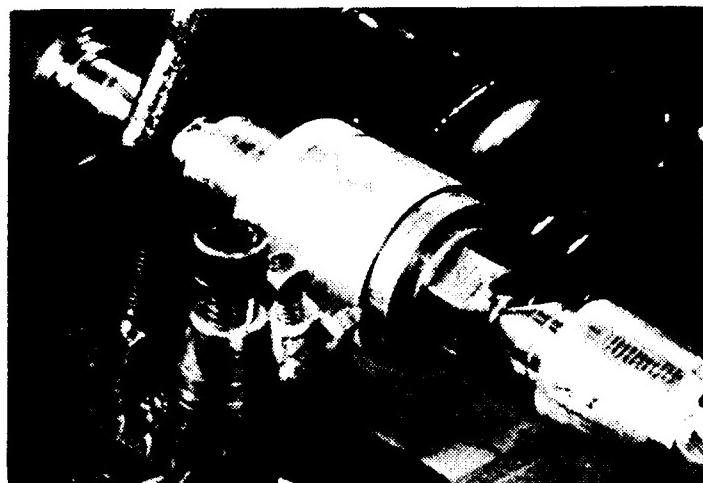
Turning Several Gear Blanks on a special Mandrel
